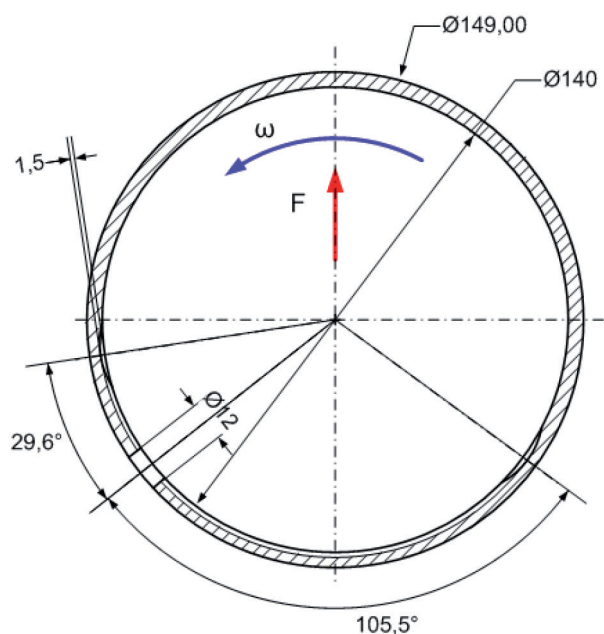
Design parameters of the bearing insert of a hydrodynamic bearing of the main support with the nominal diameter of 140 mm
